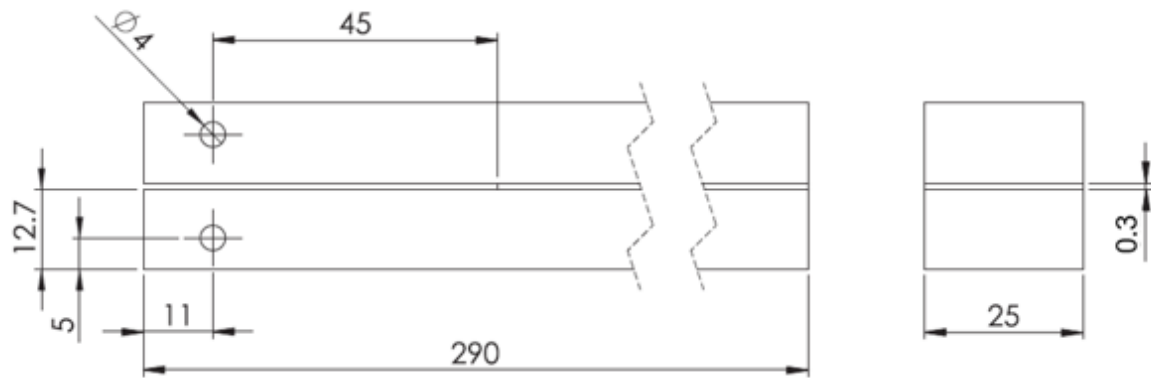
Specimens' geometry, adapted from [21] (dimensions in millimeters).
